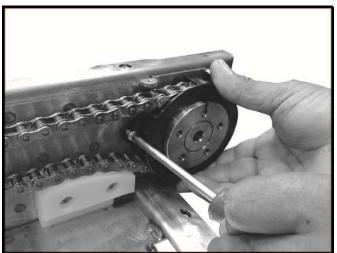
REMOVE LH and RH Front Chain Cover
